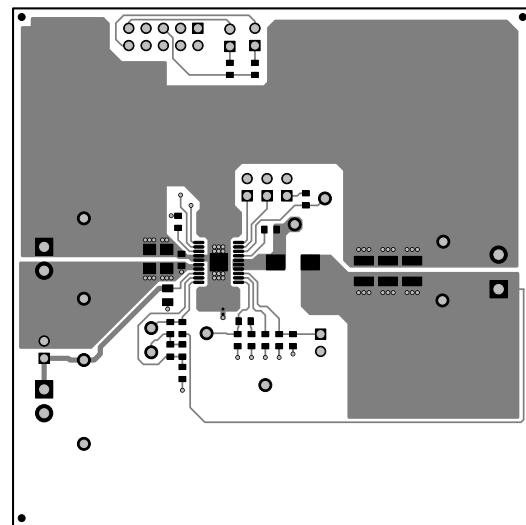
TPS56921EVM-188 Top-Side Layout
